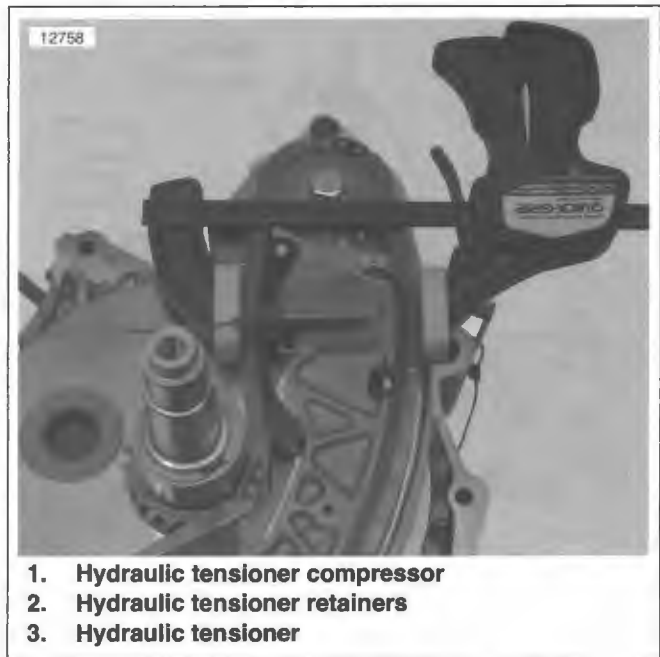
Hydraulic Tensioner Tools (Front Tensioner Shown)
